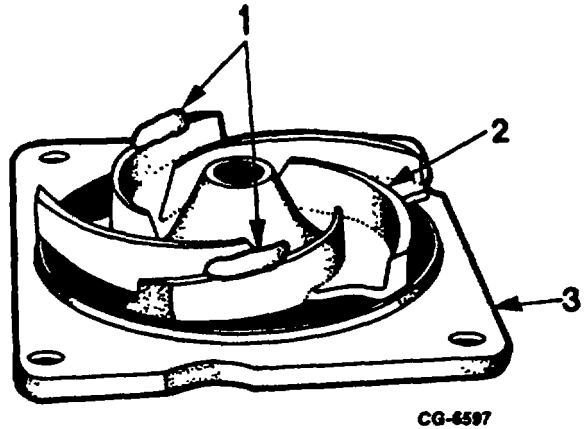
Moulding Clay Mounted on Impeller Vanes to Check Impeller Clearance
